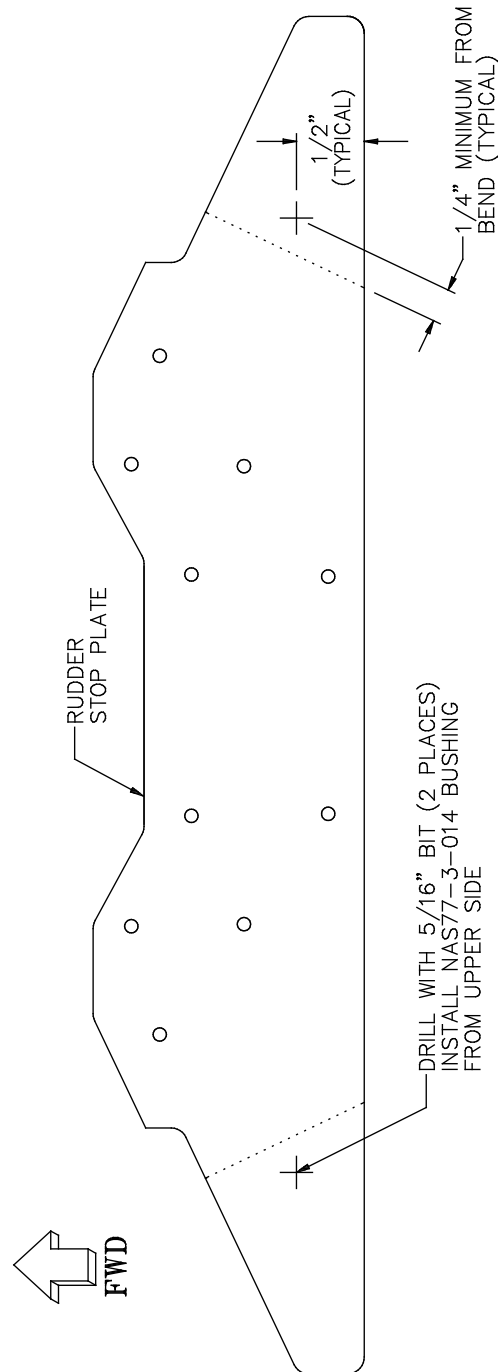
Drilling Holes for the Tailwheel Steering Cable Bushings (Taildragger Only)
